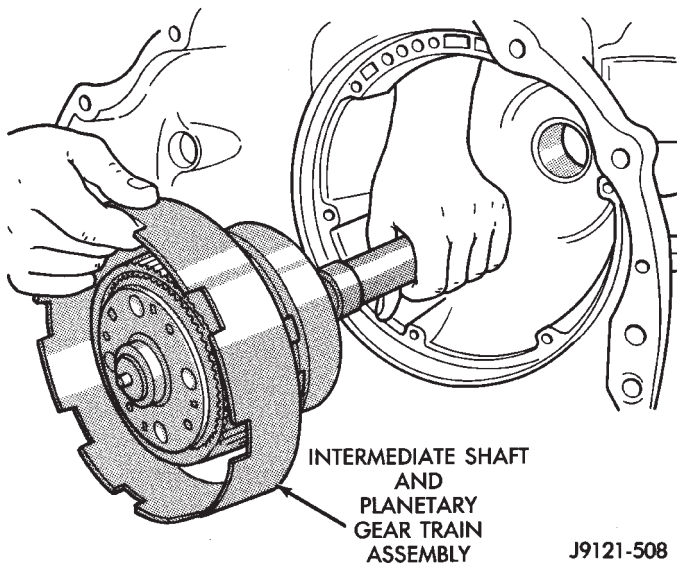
Installing Intermediate Shaft And Planetary Geartrain—46RH
